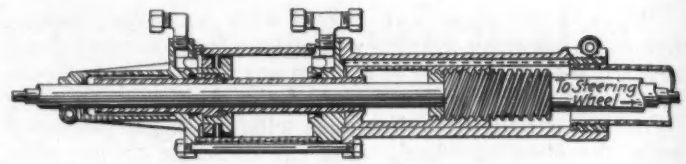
PISTON-PUMP OPERATED BY THREAD AND NUT
